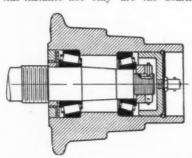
Typical Bearing Mounting for Pallet Wheels of Slag Conveyors
